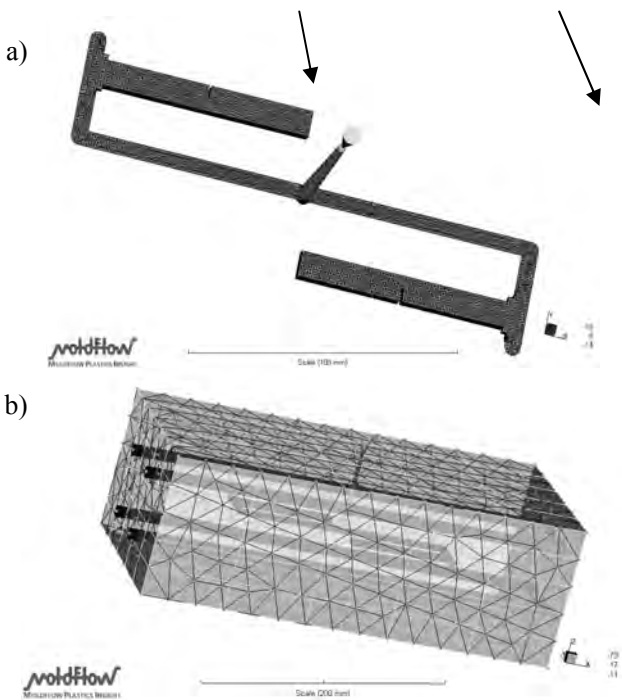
FEM model of injection moulded part (a) and mould with runners (b)
